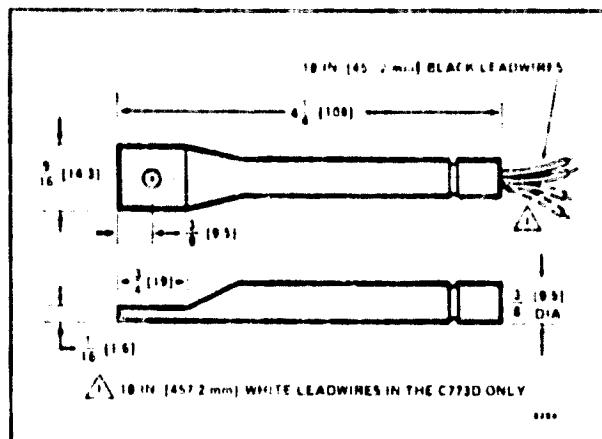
C773C,D DIMENSIONS IN INCHES [MIL-METRES IN BRACKETS].
